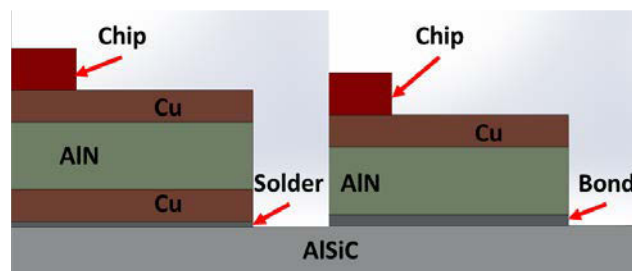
A power package stack showing the location of the DBC, and solder (Left), compared to replacing the Cu and solder layers with the TLP bond (Right).
